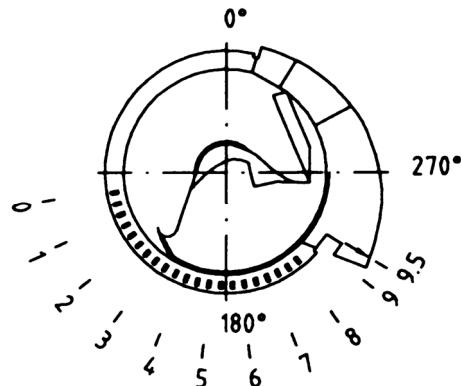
Adjusting the air intake nozzle for DZ 2 and DZ 3:
